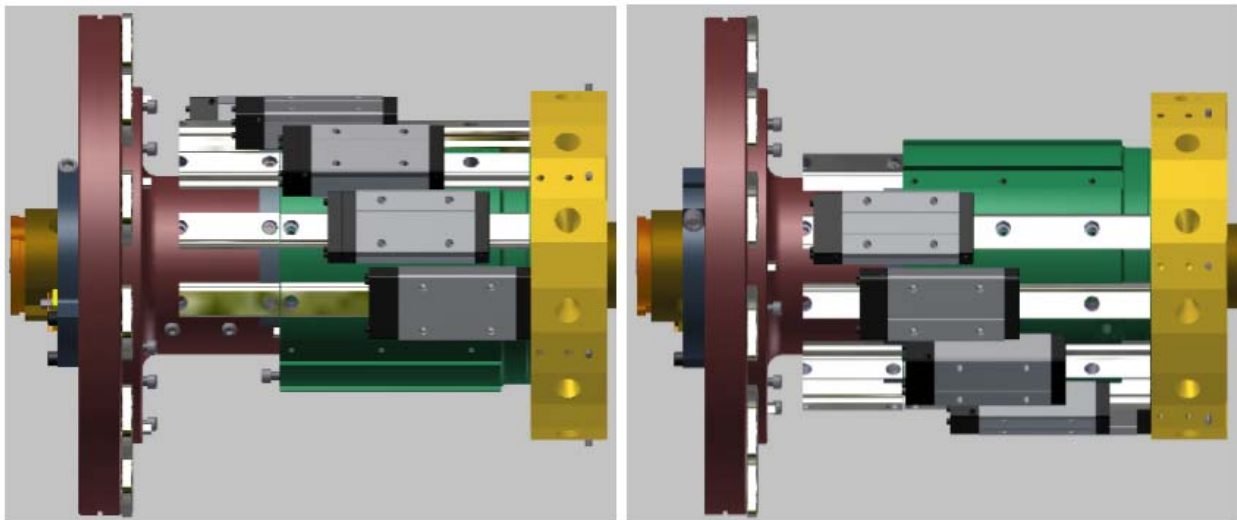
Checking the slide track with # 8950719, Rev 01 or later, tool on the turret.
